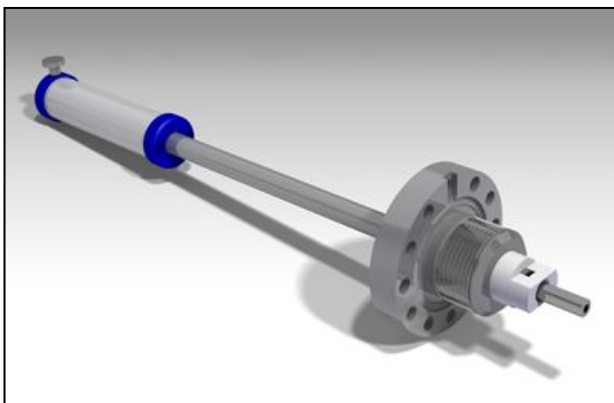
WM40HT: single shaft wobblestick with MKSHT
